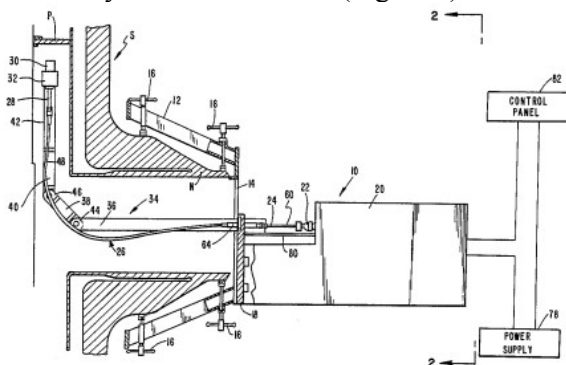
Remotely actuated metal disintegration machining apparatus [6].
